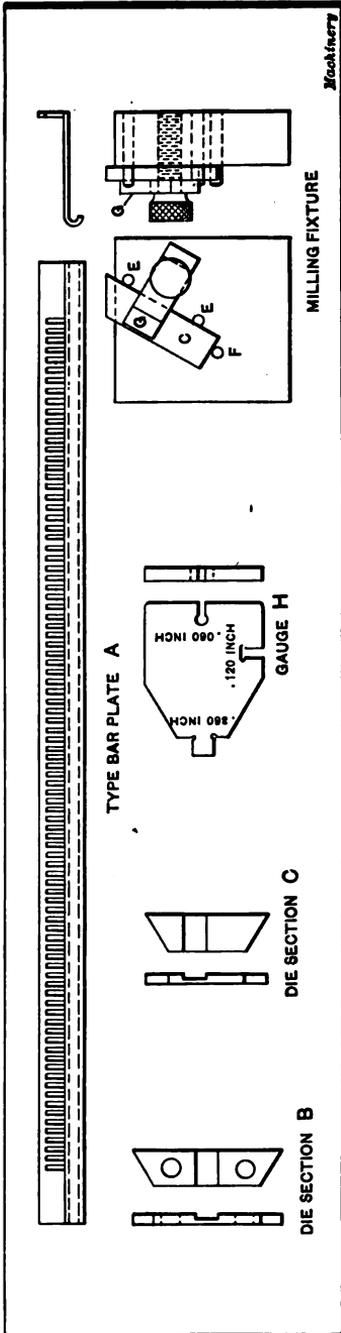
Type Bar Plate A, Die Sections B and C, Gauge H, and Milling Fixture for making Die Sections
